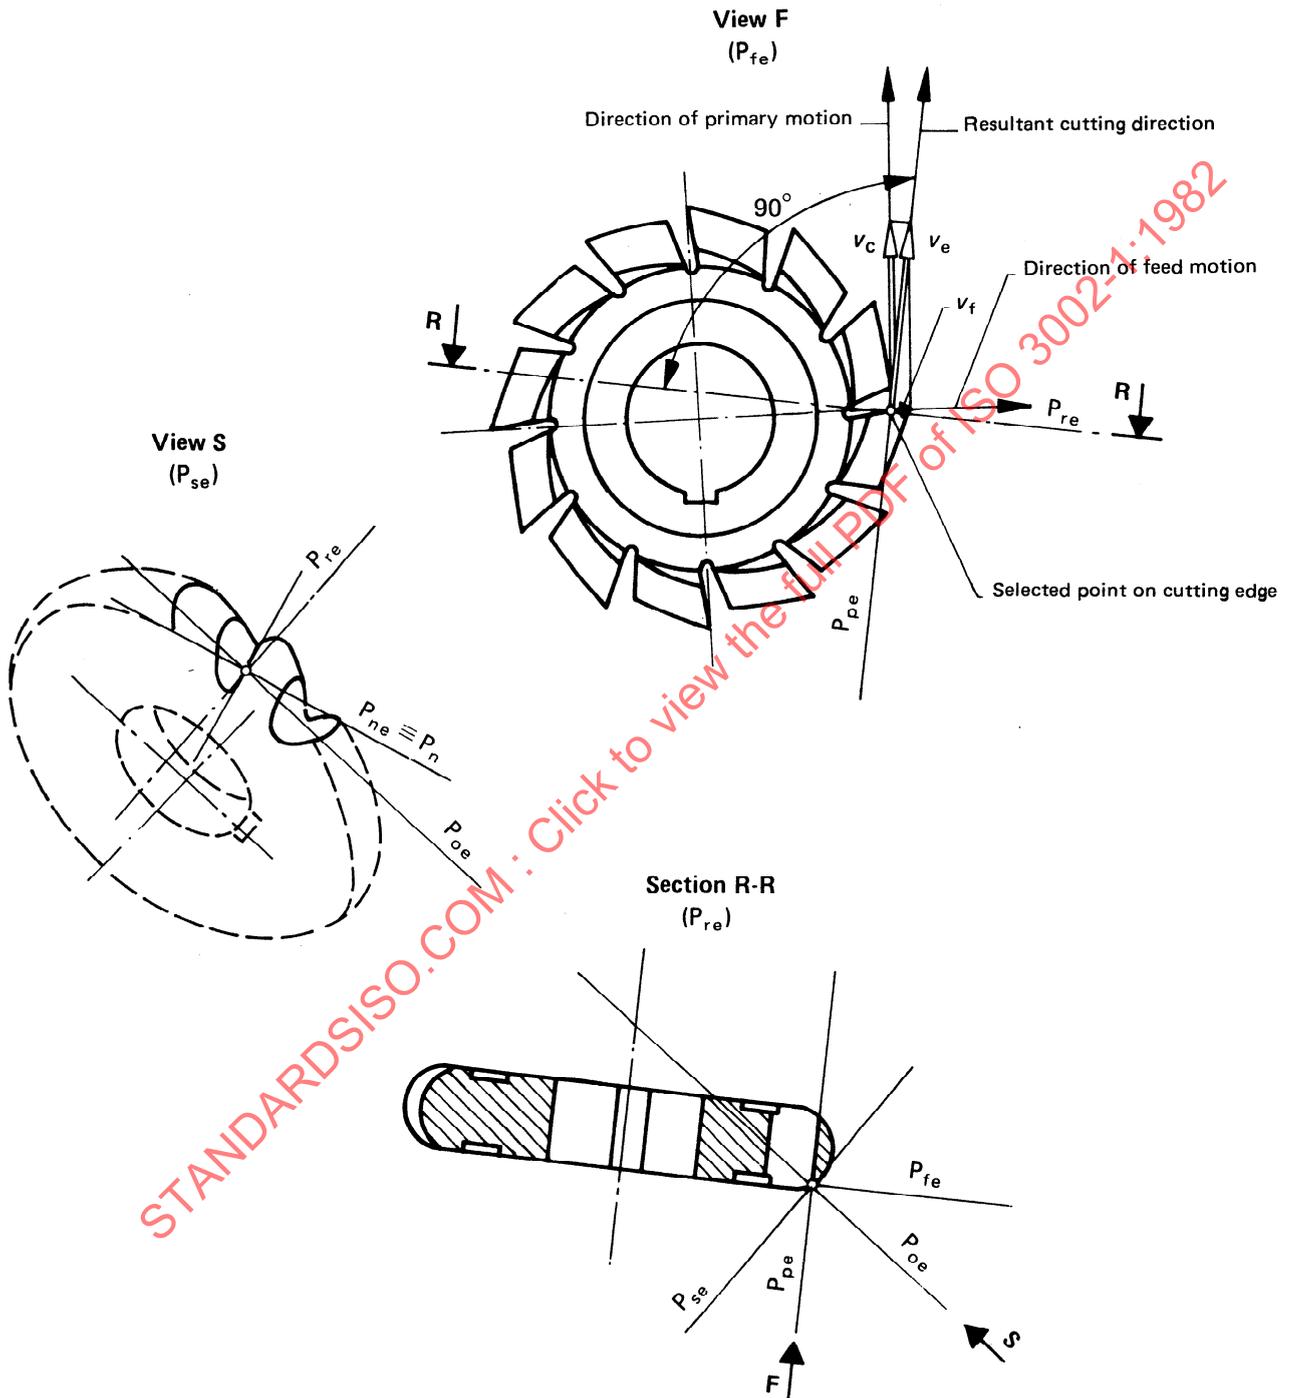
Planes in the tool-in-use system — Convex milling cutter
